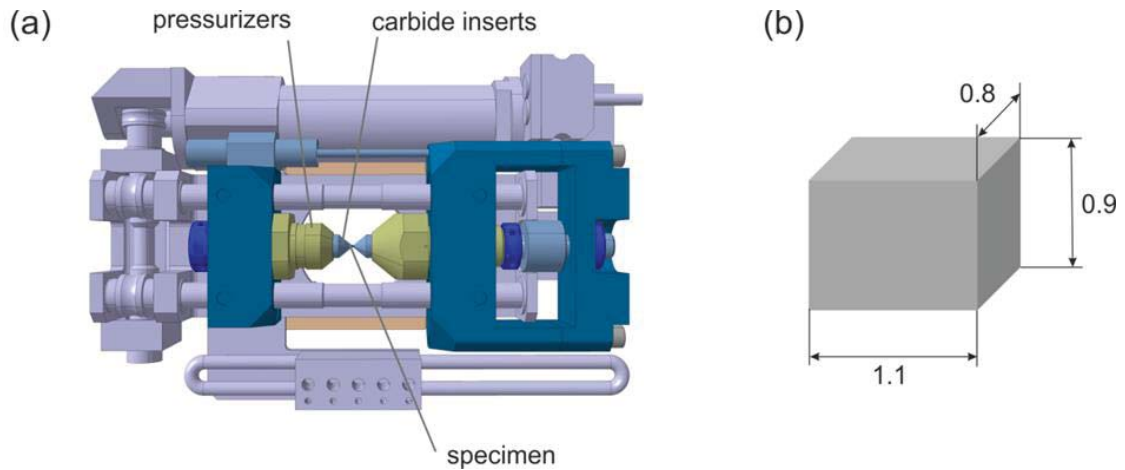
Technical drawings of (a) the micro compression machine (K&W) and (b) the cuboid specimen.
